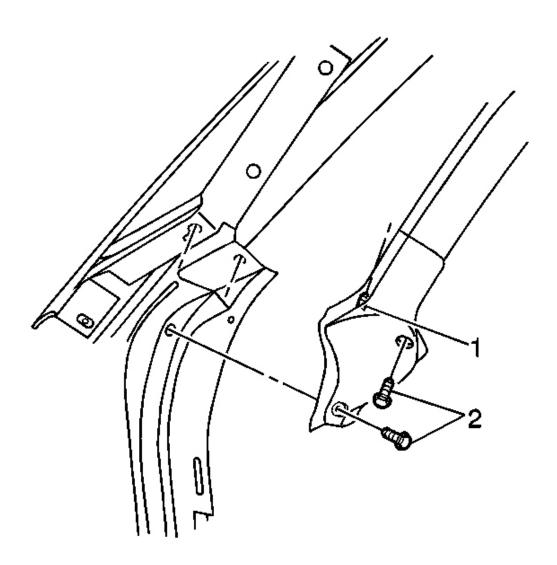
View Of Weather-Strip Retainers Courtesy of GENERAL MOTORS CORP.
